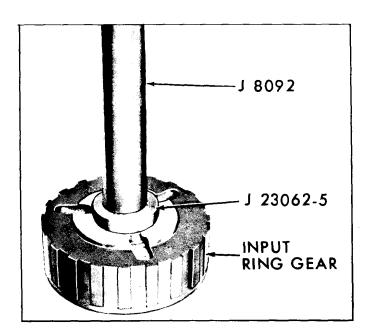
G-120 Removing or Installing Input Ring Gear Bushing
